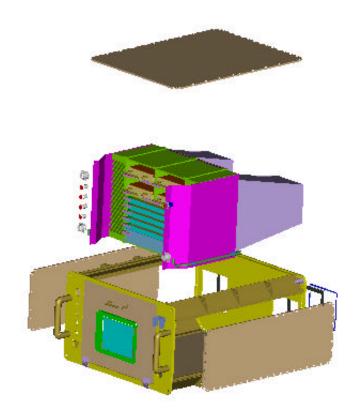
Put the CHASSIS assembly into LOCKER and fasten them together
